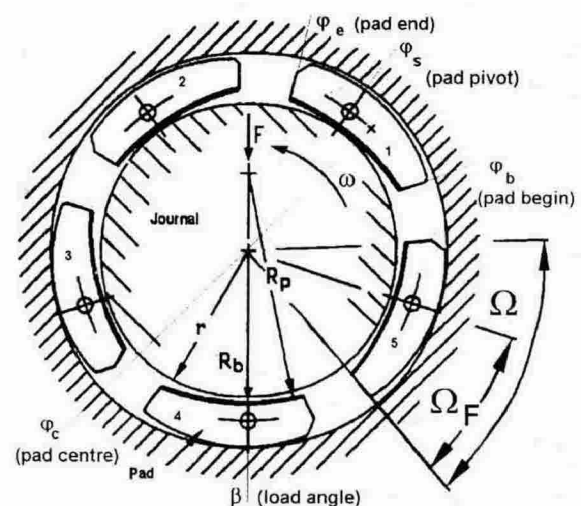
Tilting 5-pad journal bearing with asymmetric support of pads
